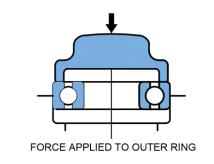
MILD STEEL TUBE WITH AN END CAP FOR DRIVING AN OUTER RING
